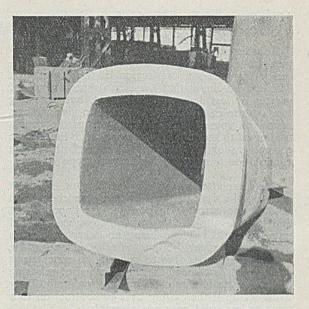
The Castings usually Strip Cleanly, and very little Fettling is Required. This is Attributed in Large Measure to the Accuracy of the Machined Joints of the Boxes used.
